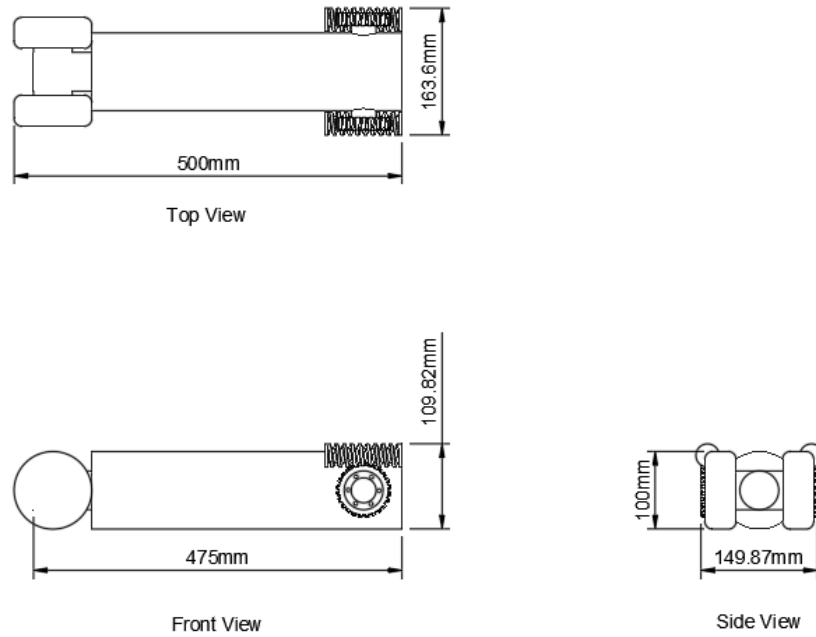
Landing Gear (with worm gear) Fully Retracted Three-Dimensional View
